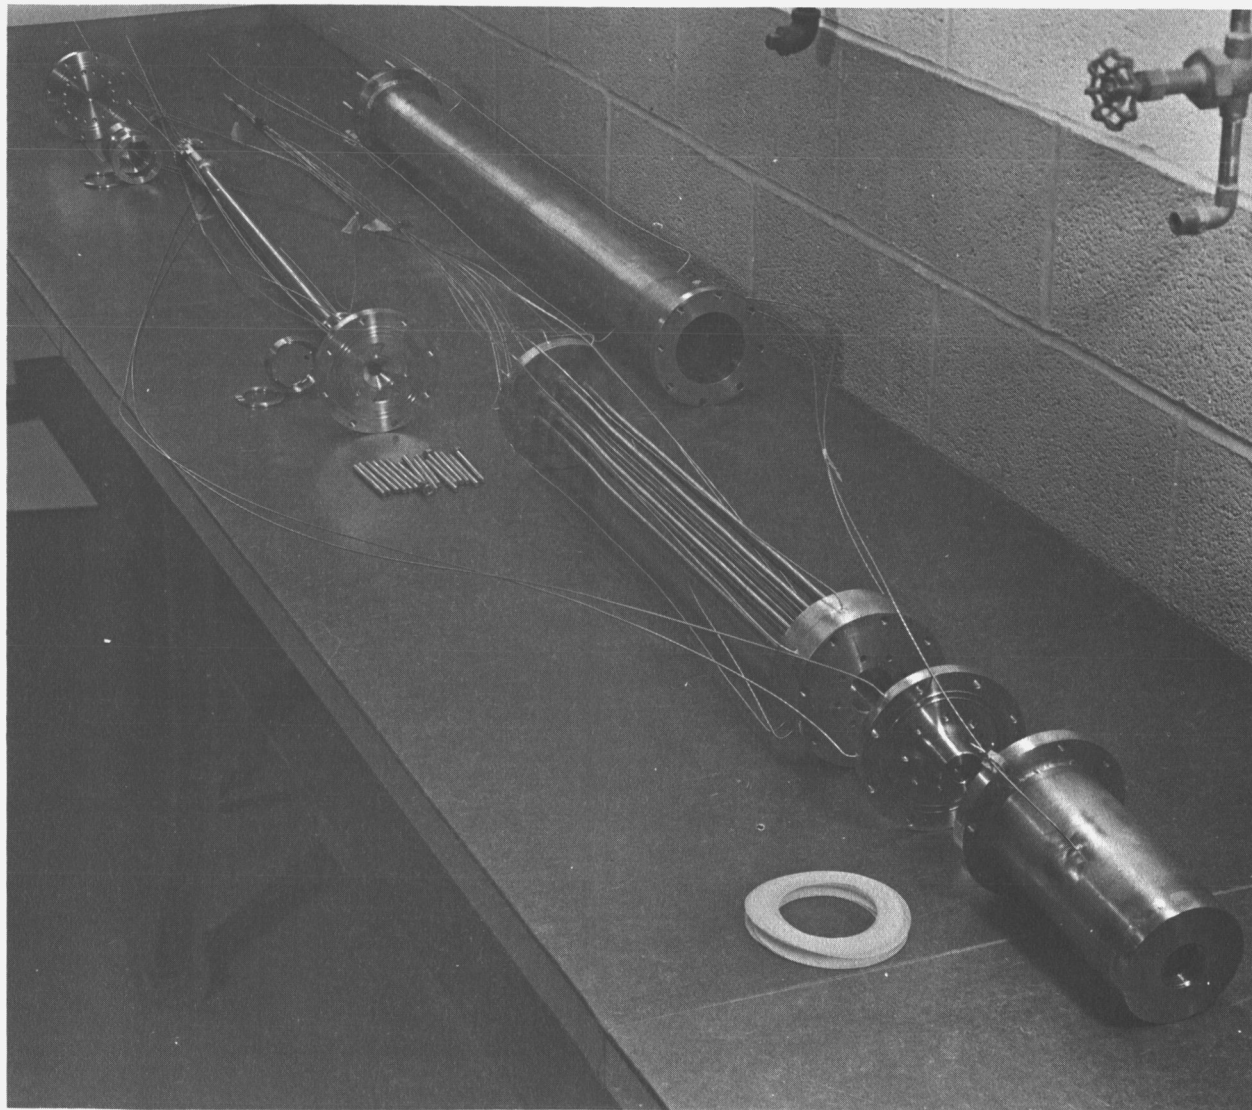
Control Drum-Drive Shaft Assembly - Inlet Side
